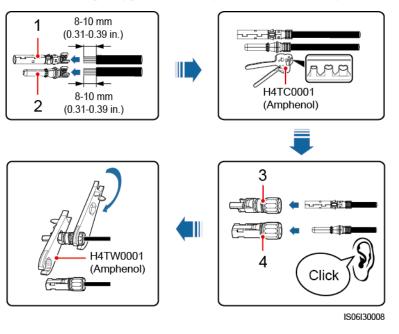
Preparing positive and negative connectors (using metal stamping forming contacts)
